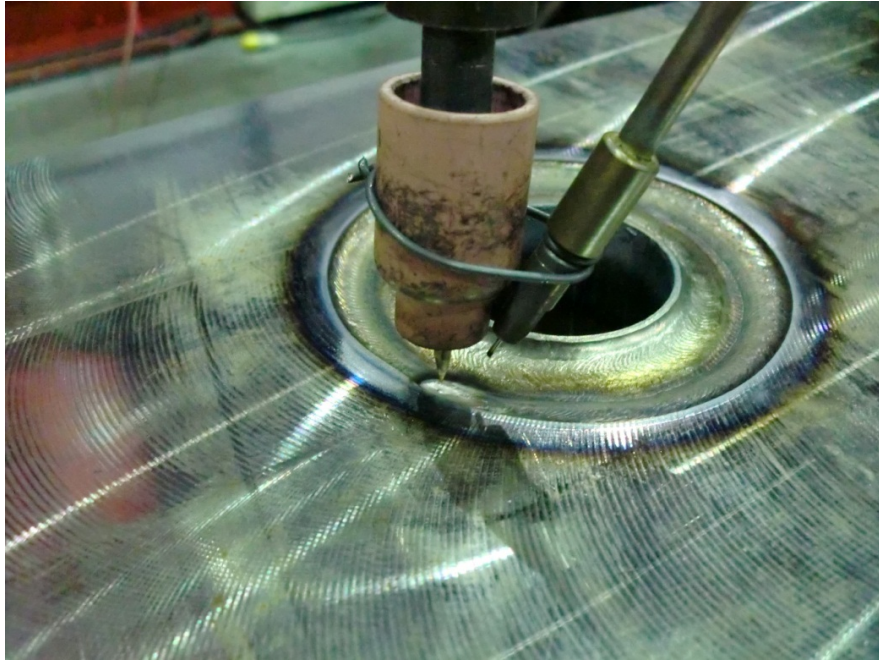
Tungsten electrode, shroud and filler wire of hot wire GTAW equipment utilised - Weld cladding undertaken by IODS Pipeclad, East Kilbride (133).
